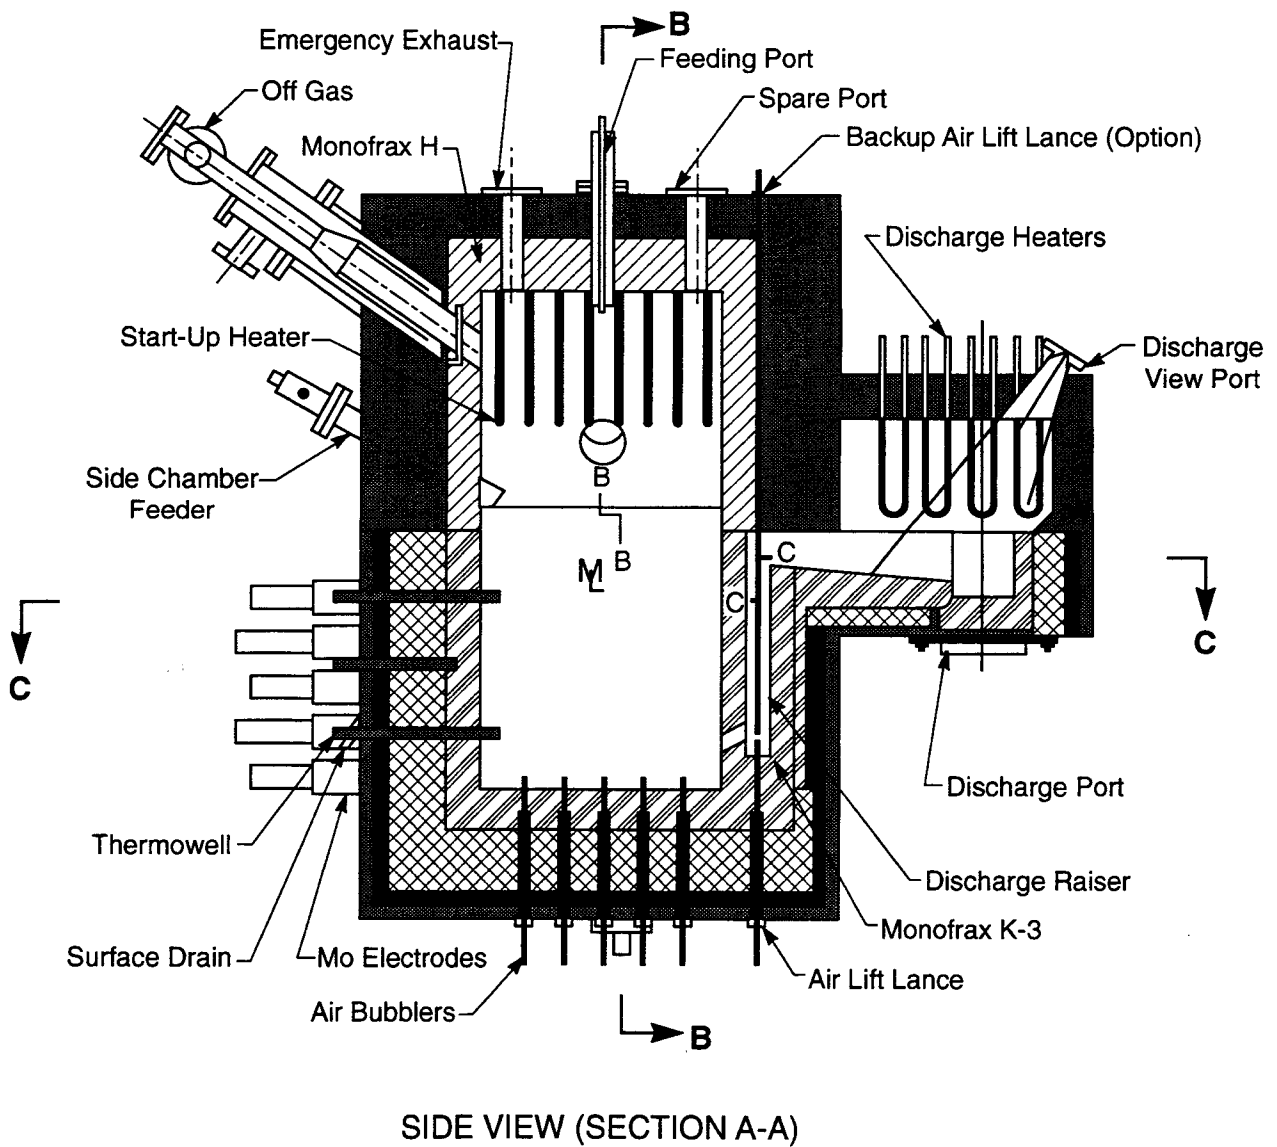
Side view of Duramelter® 1000-HT melter showing bottom bubblers (FERMCO, 1997)
